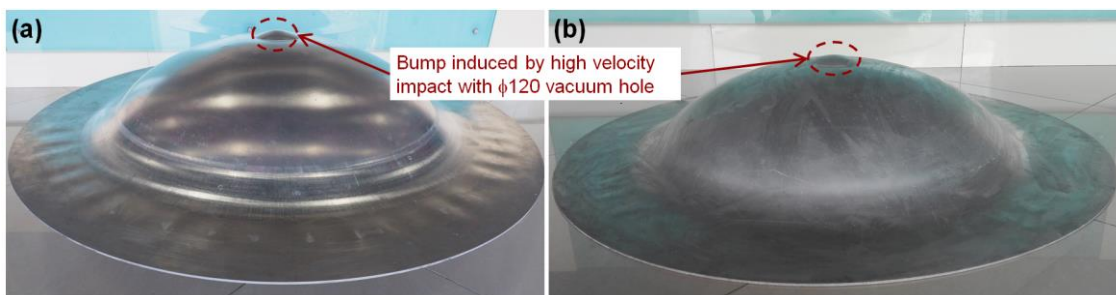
Photographs of two formed workpieces: (a) AA5083; (b) AA2219
